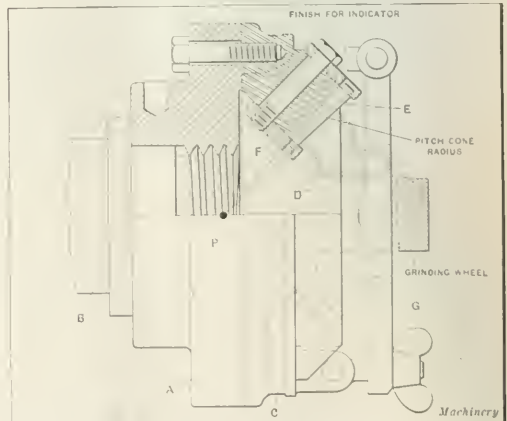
Detail View showing Construction of Bevel Gear Chuck Illustrated in Fig. 21
